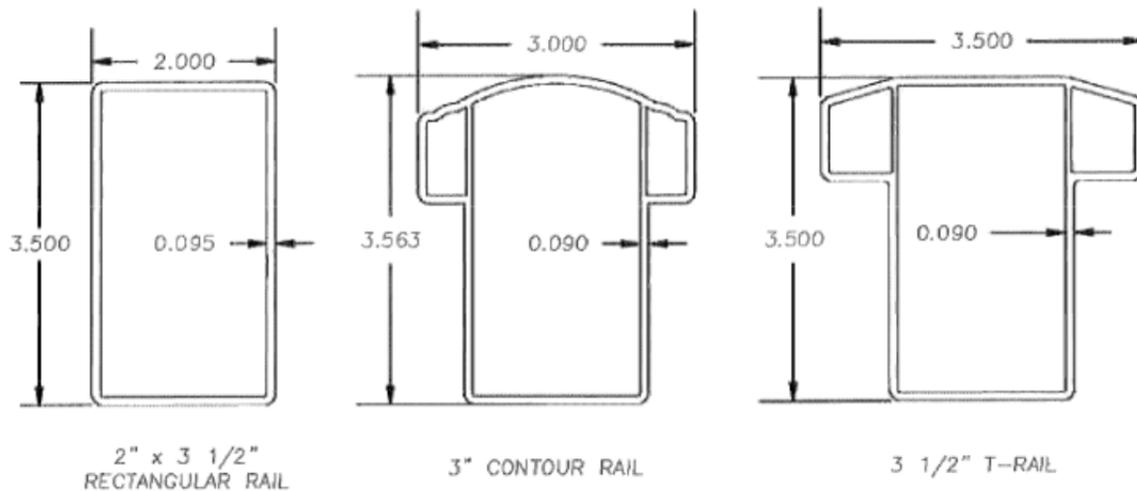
GUARDRAIL COMPONENT PROFILES
